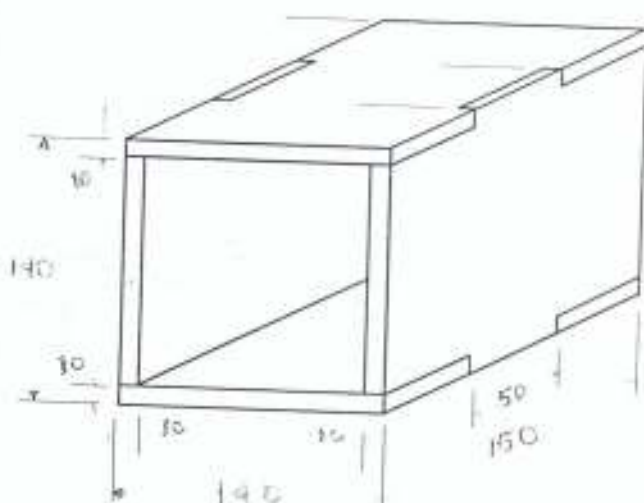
Isometric View of the Work Tube Silica Refractory Slabs and the Assembly (x 0.25, Dimm; mm)
